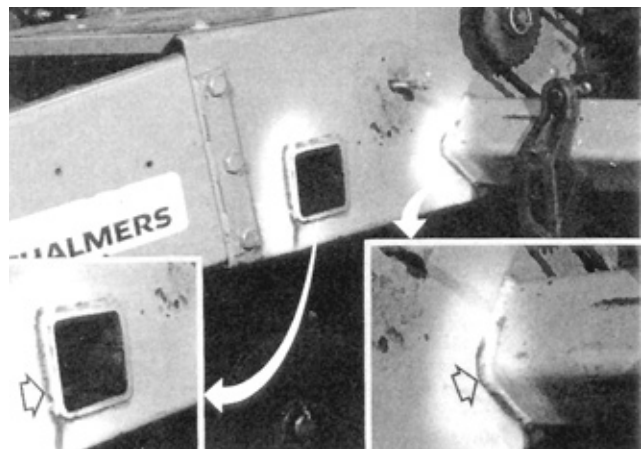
Weld Failures on Tongue Frame.
